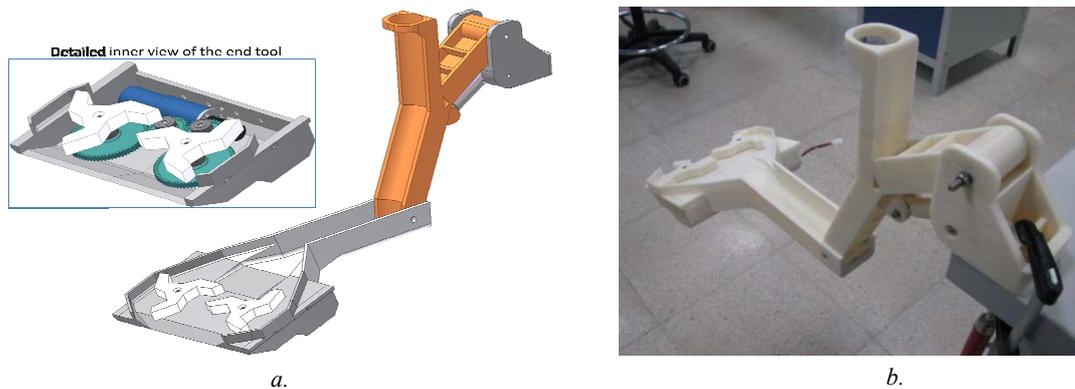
Cleaning-recover coal device a) Design b) Prototype
